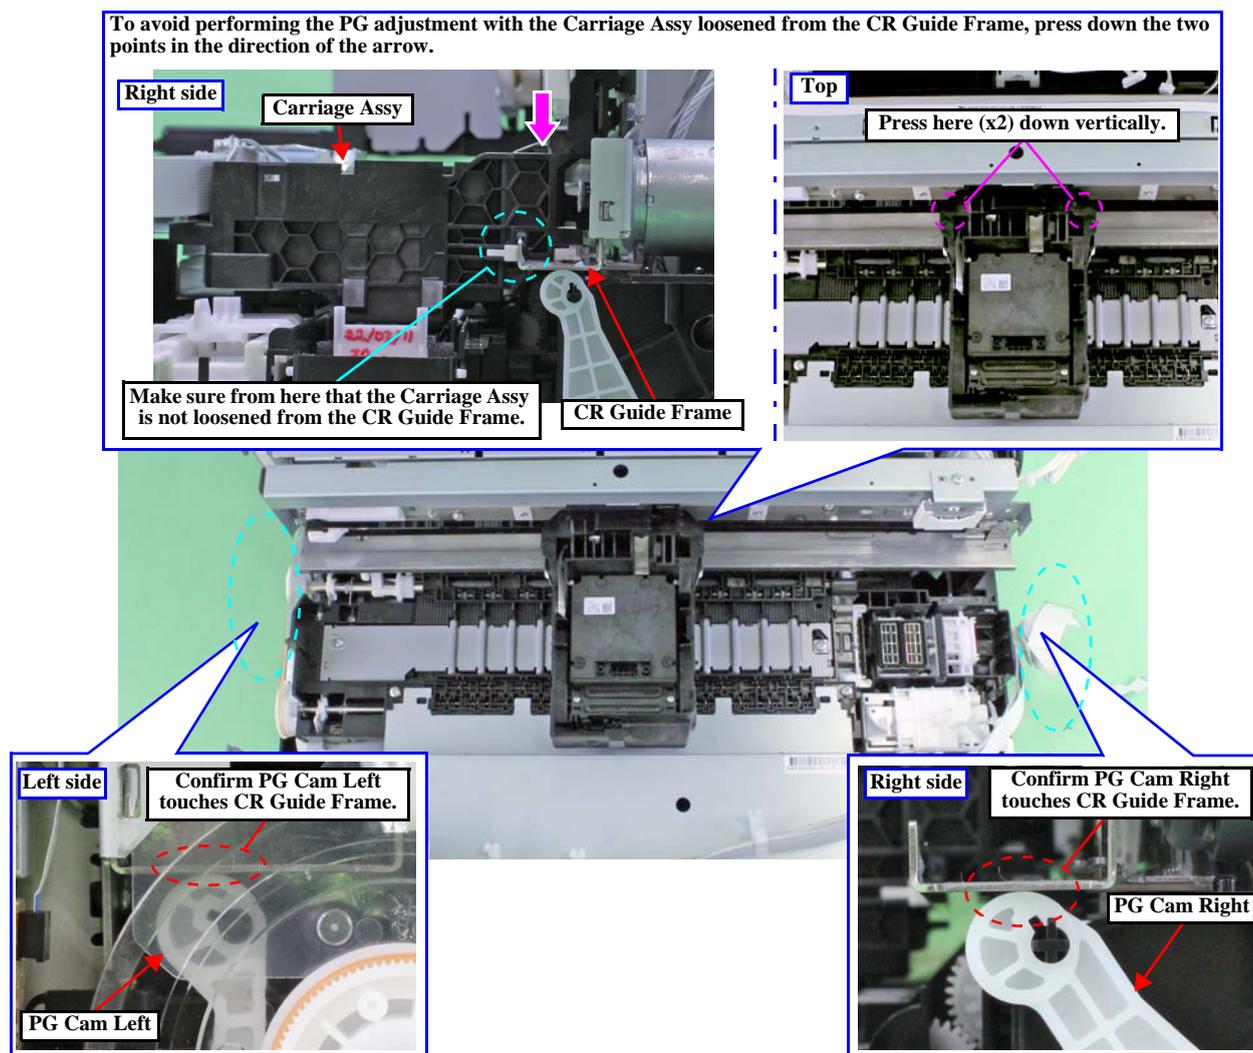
The PG Cam Right/PG Cam Left and CR Guide Frame
